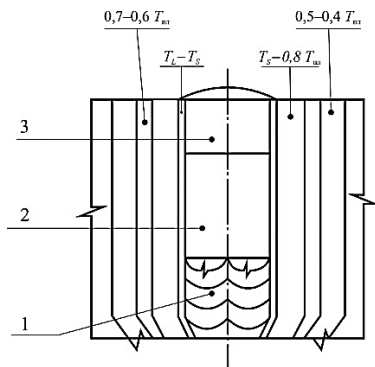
Scheme of calculated temperature fields in the welded joint of the rotor: 1 – lower zone of the weld; 2 – middle zone; 3 – upper zone
